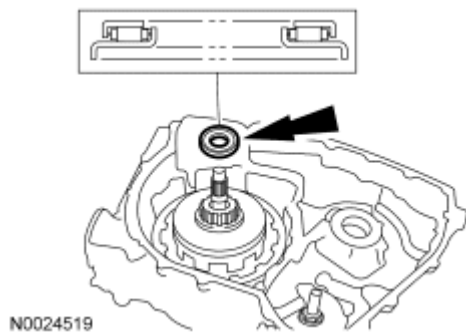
No. 7 Reverse/Overdrive Sun Gear Thrust Bearing
